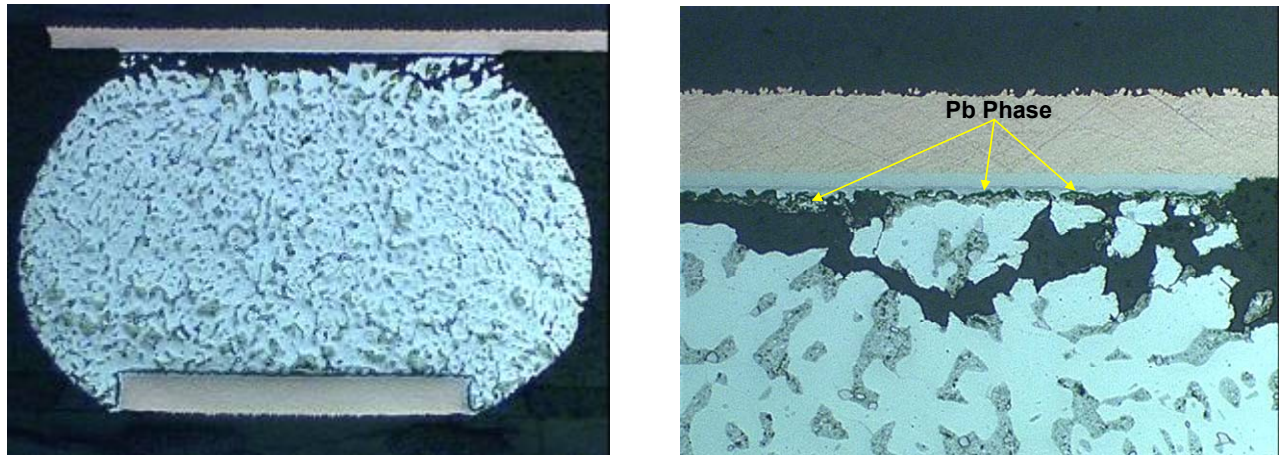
(left) BGA-225 SAC-SnPb combination solder joint; (right) magnified view of crack with Pb phase present
